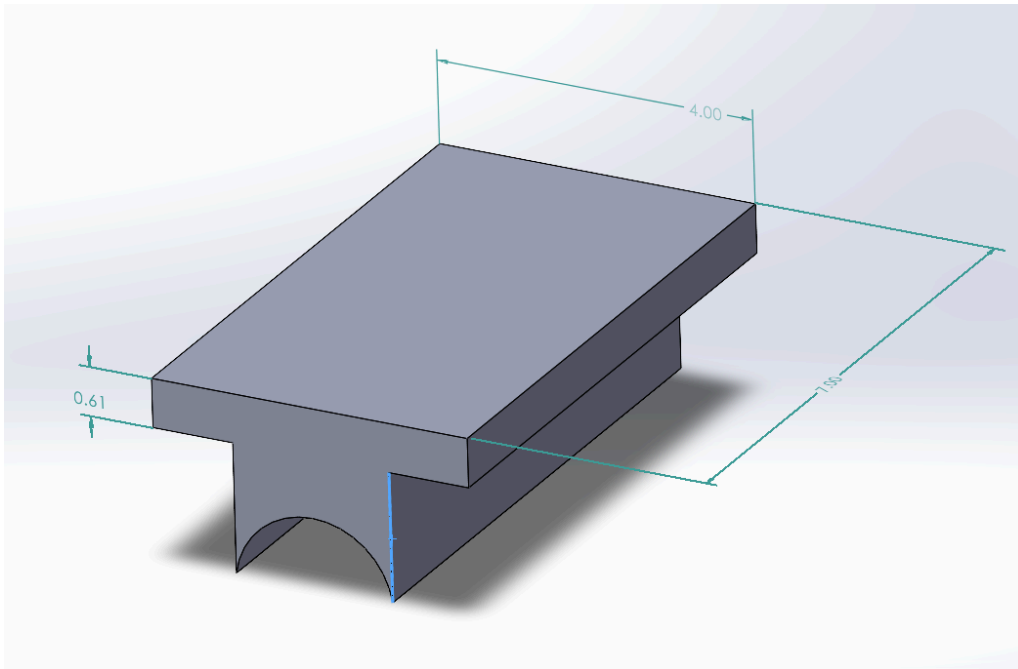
CAD model for the top piece of the compression mold. (dimensions in cm).
